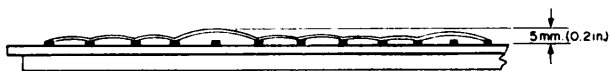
Example of a Stitch-Wired Board (Ref. 14)
